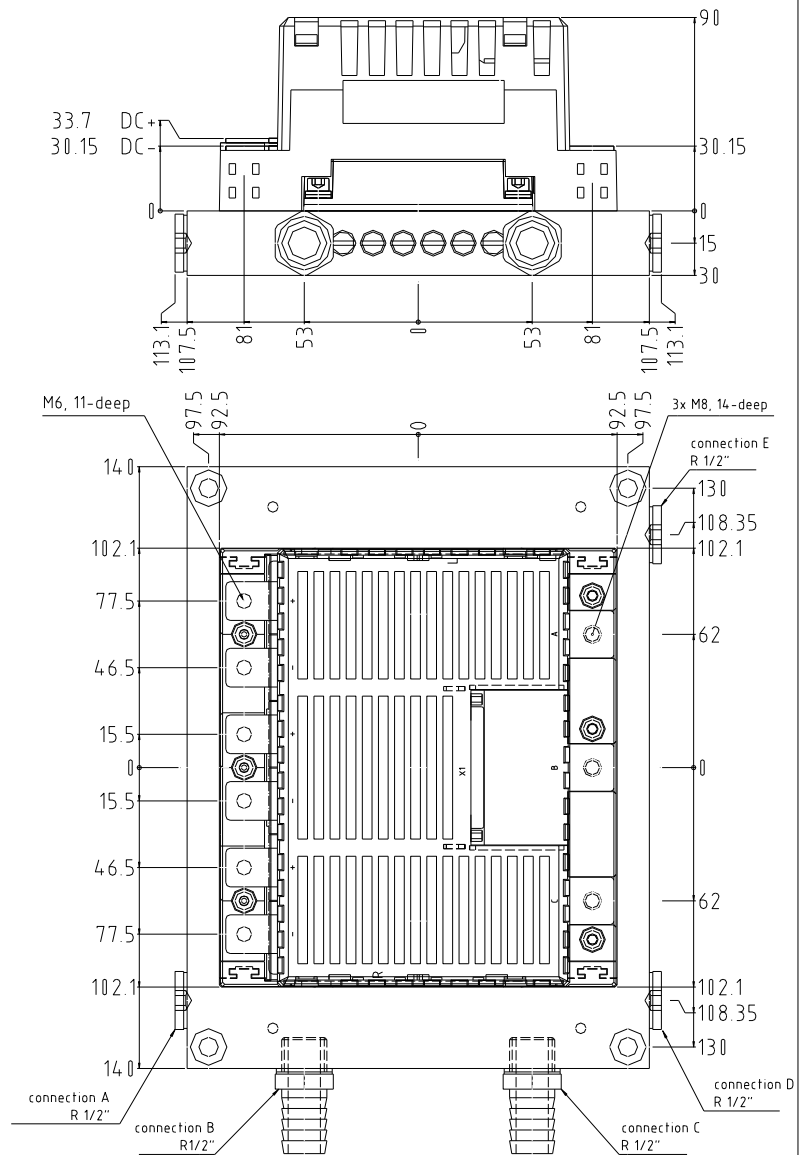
Technical drawing PrimeSTACK in size C3 with water cooler
